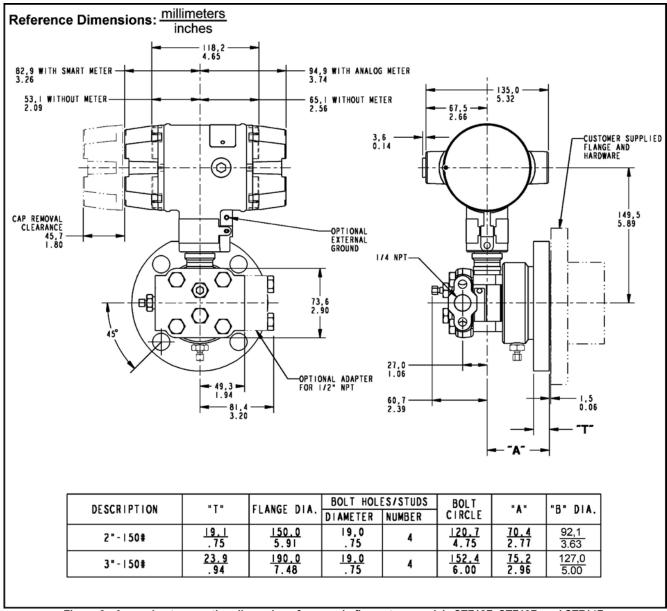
Approximate mounting dimensions for pseudo flange type models STF12F, STF13F, and STF14F.
